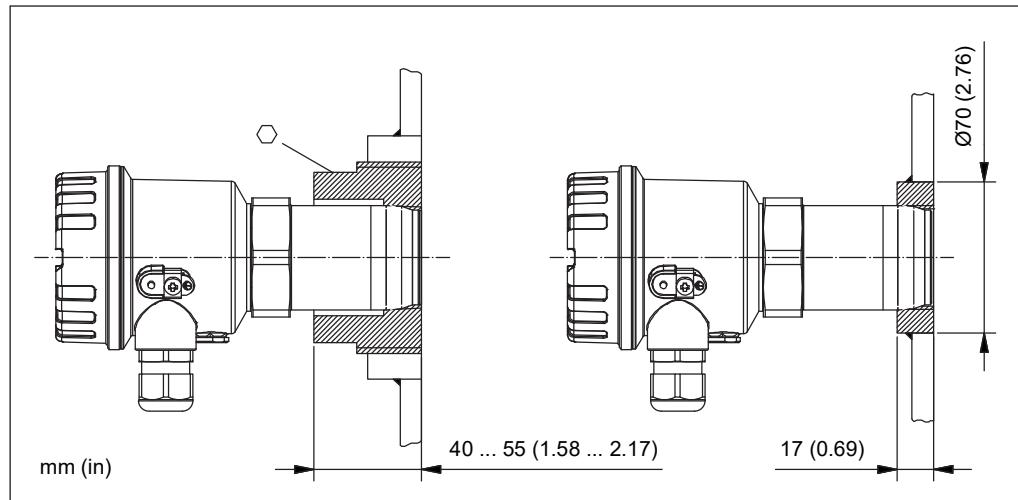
FAR52 weld-in or screw-in adapter
